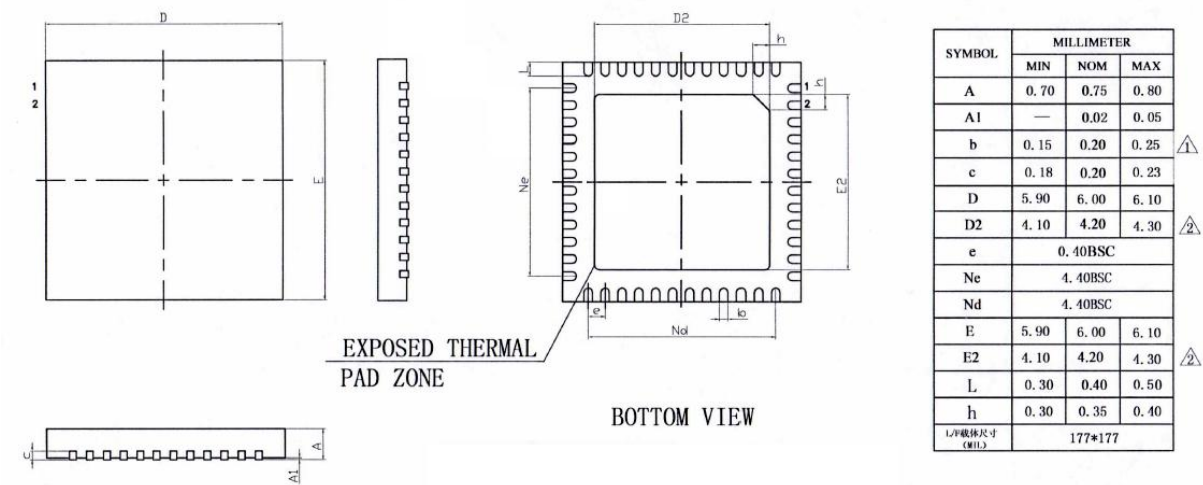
QFN48 (6 \* 6 mm) Package Outline Drawing
